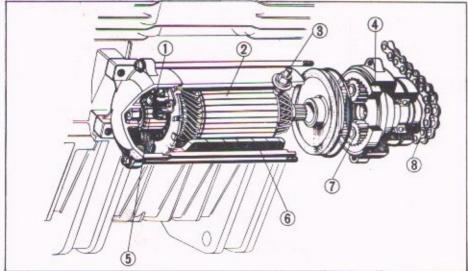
(1) Carbon brush (2) Armature (3) Terminal (4) Inner gear (5) Commutator (6) Field coil
